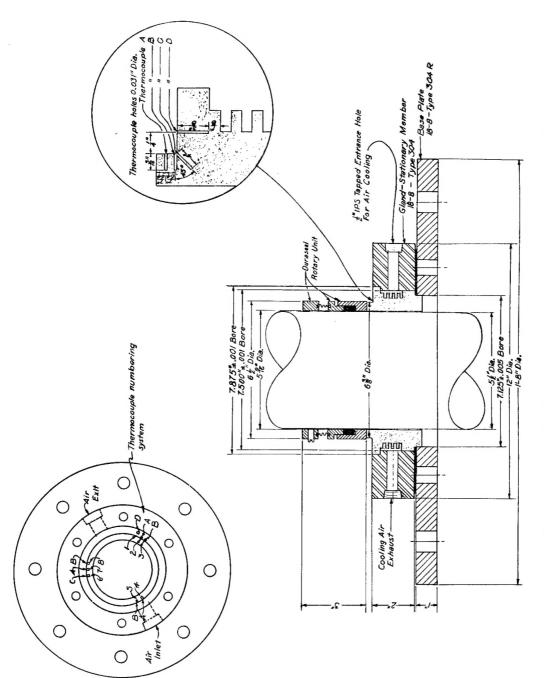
Thermocouple locations modified air cooled gland insert assembly.
